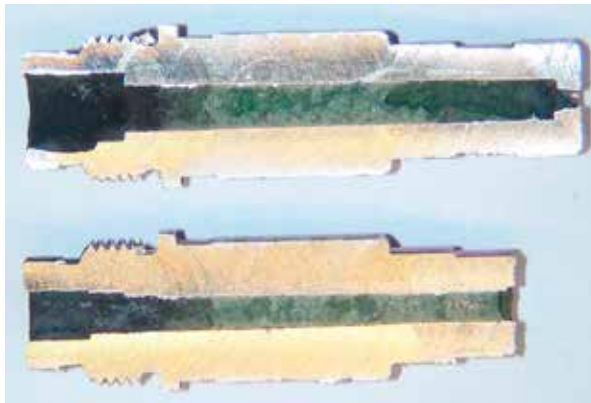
Longitudinal half cross section of fired multi-segment delay element with last W-11 output segment (upper section) and longitudinal half cross section of fired shortened delay element without last W-11 output segment (lower section).
